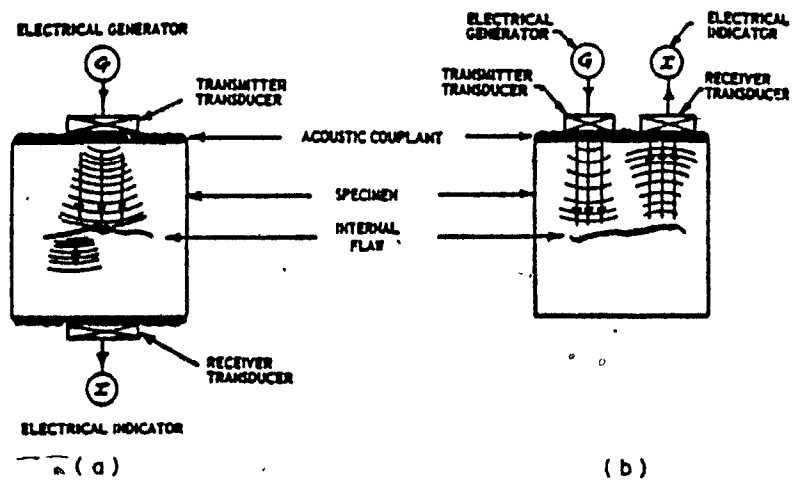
Reflection and transmission ultrasonic inspection techniques.
